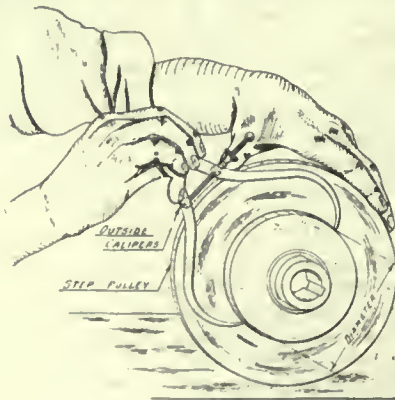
FINDING AN OUTSIDE DIAMETER WITH OUTSIDE CALIPERS.
